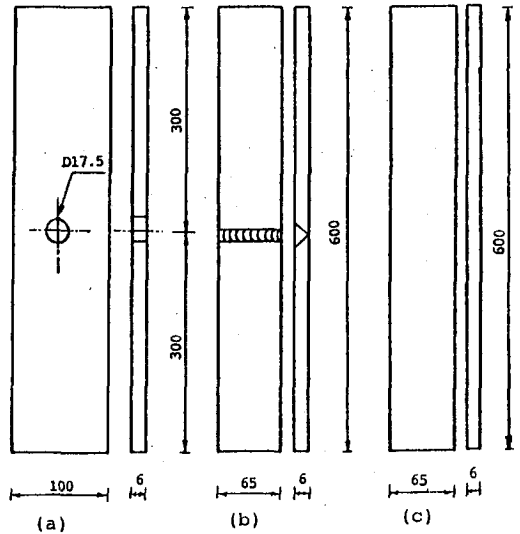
(a) With circular hole (C), (b) Welded (W) and (c) Base metal (M) specimens
